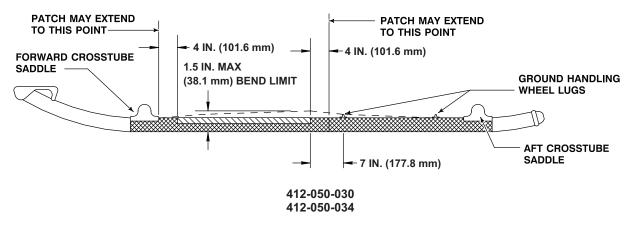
Landing Gear Assembly and Attaching Parts — Damage Limits (Sheet 2 of 9)
